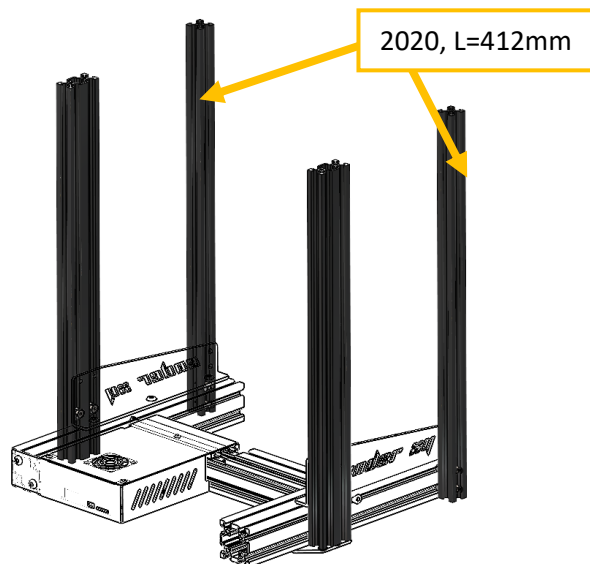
2020 Extrusions L=412mm mounting to bottom frame
